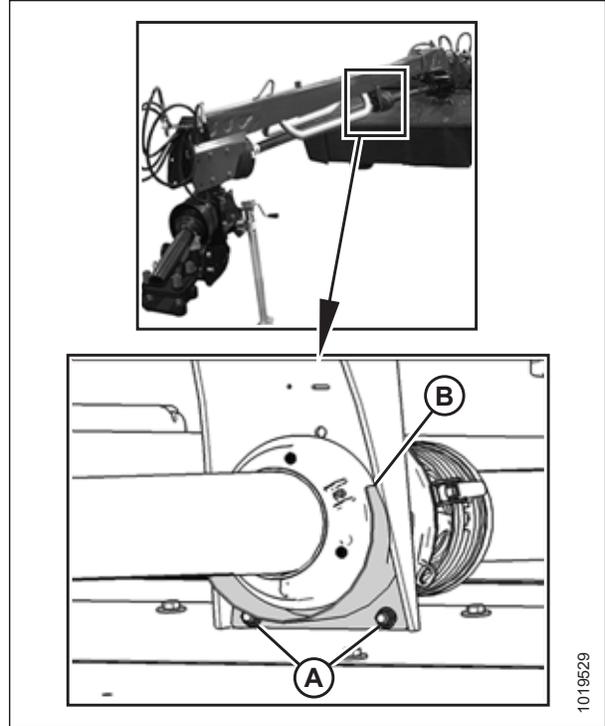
Driveline Cover and Shield Installed at Center Support
